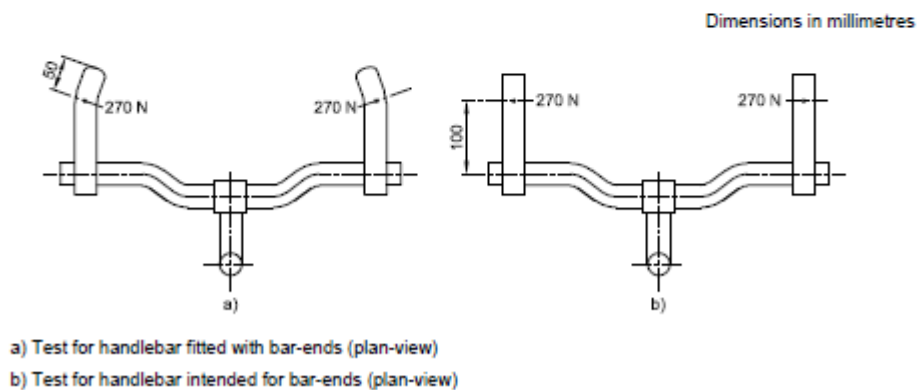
Handlebar incorporating bar-ends – out-of-phase fatigue tests
